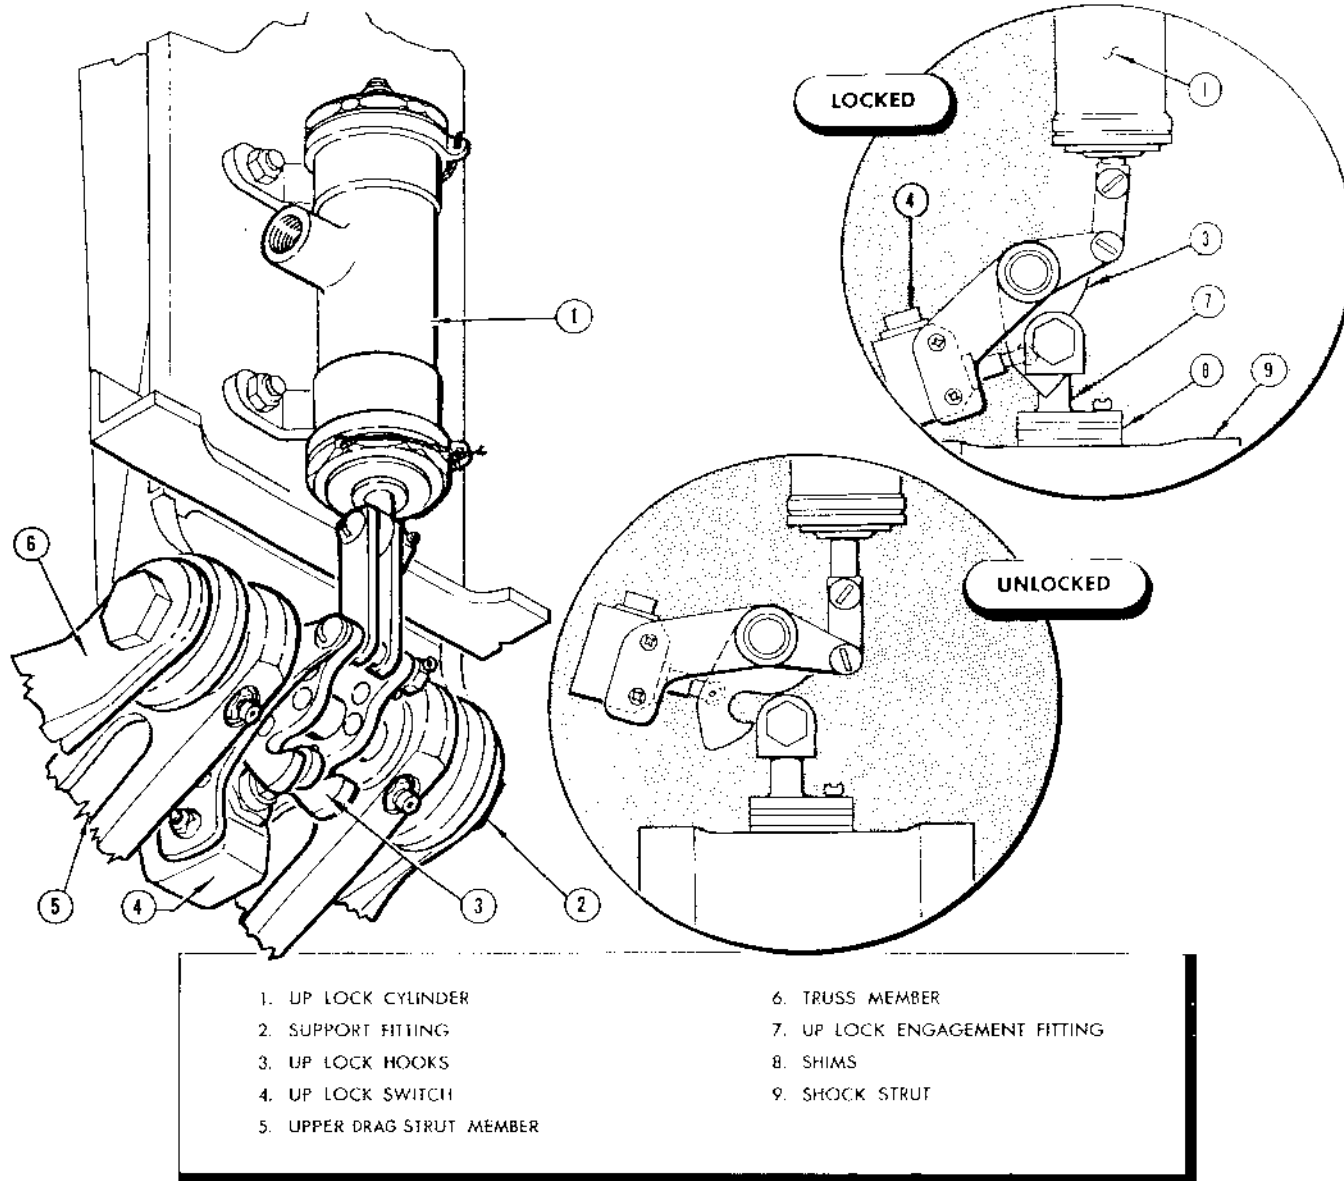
Nose Gear Drag Strut Upper Pivot and Up Lock
